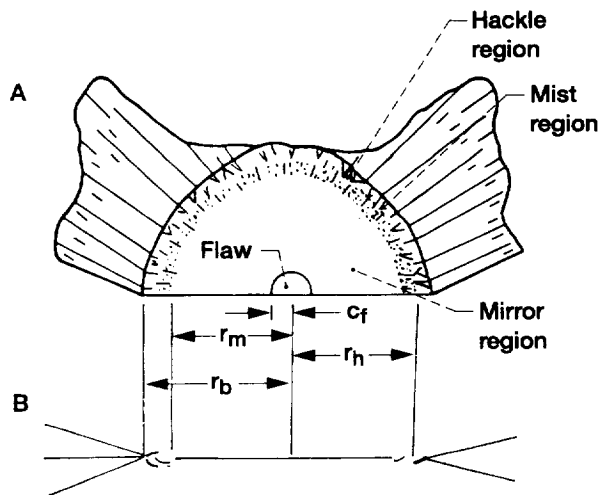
Schematic of fracture mirror, mist, hackle, and branching patterns on typical ceramic fracture surface [1]: c_f represents the critical flaw size, and r_m , r_h , and r_b represent the fracture mirror size, hackle length, and crack branching length, respectively. A fracture surface and a crack branching pattern represent in A and B, respectively.
